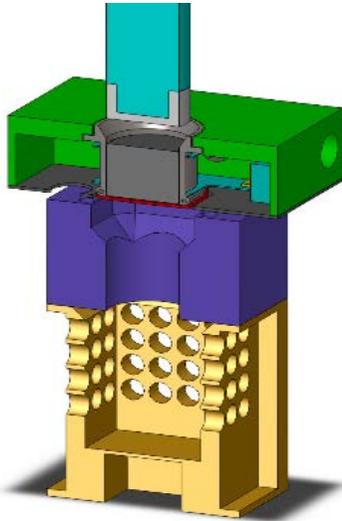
Rendering of a CHEMSENS unit showing the lower beaker and upper actuator assembly.
